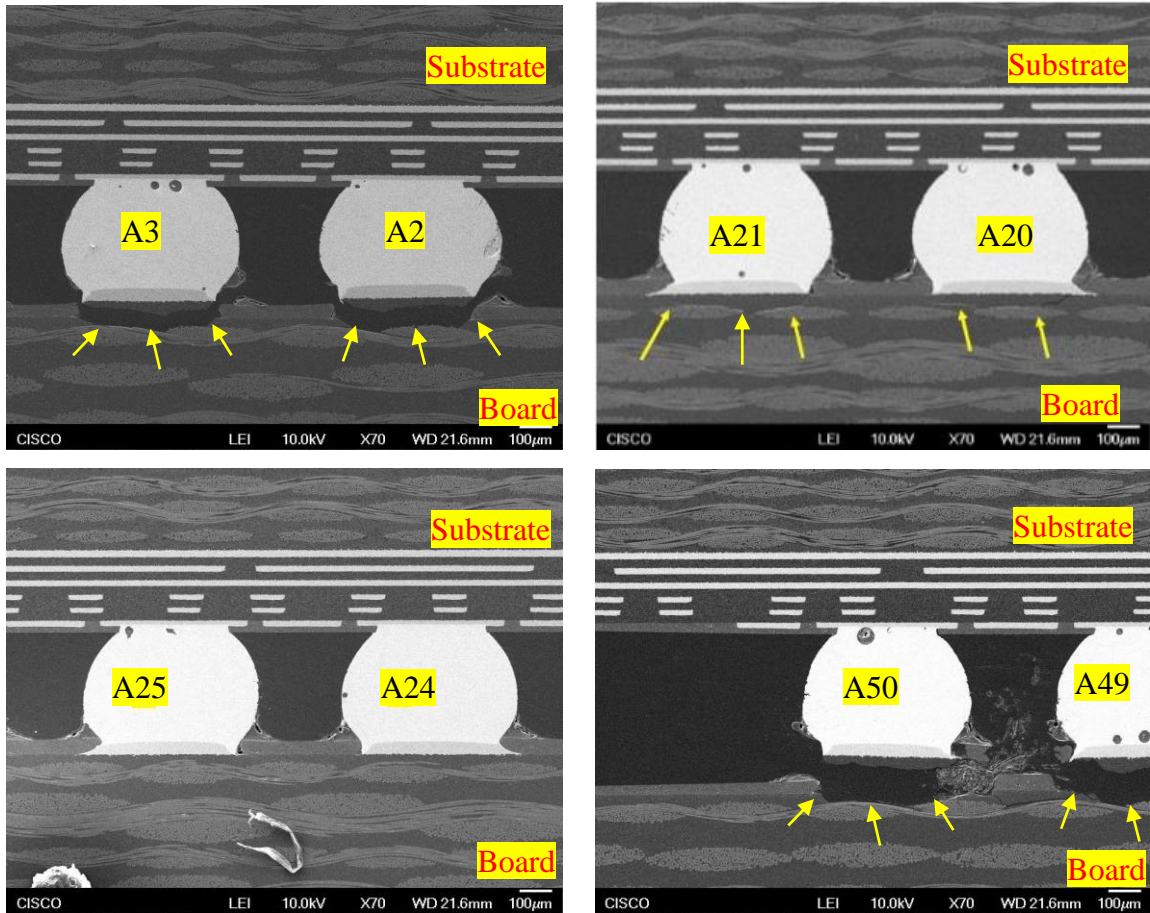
SEM images of selected solder balls along the cross-section AA for board #2
